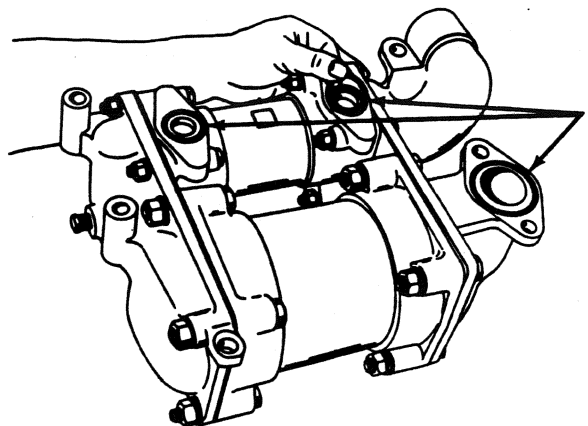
Installing O-rings in Oil Cooler Assembly (T-51745)
